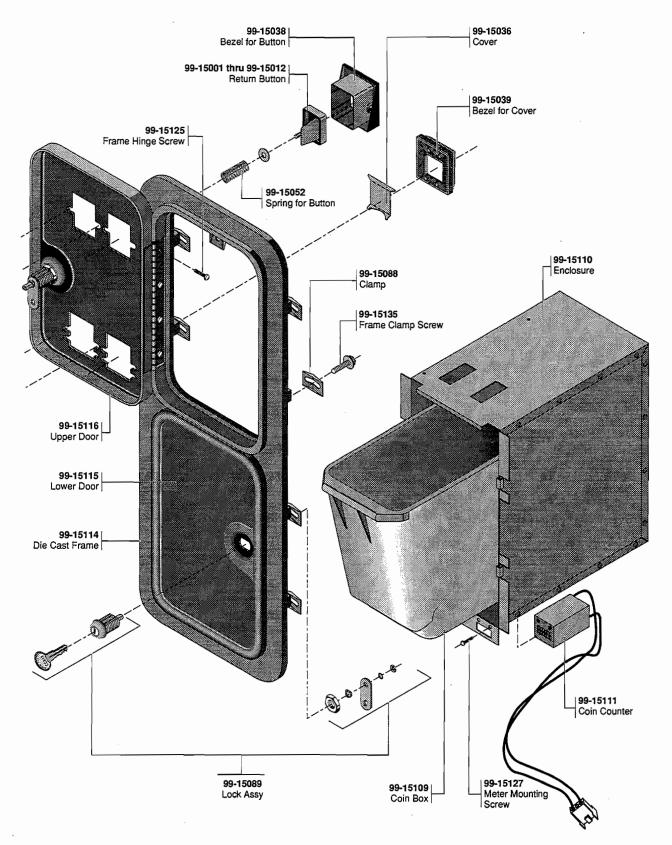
Coin Controls, Inc. Coin Door Assembly, Continued 171093-001
